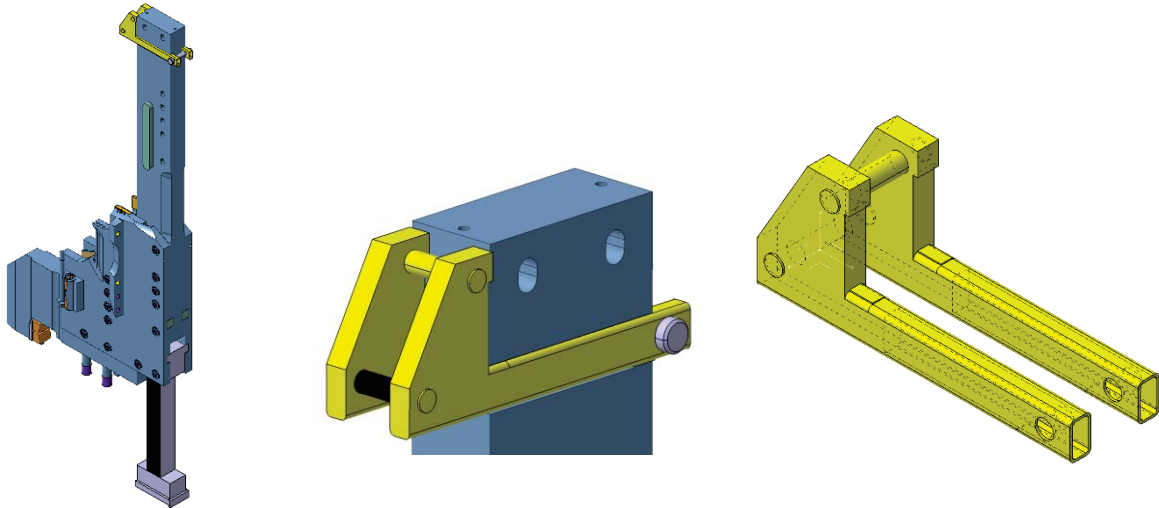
Design of a possible form of the handling equipment for the lower subassembly of the C-frame.
